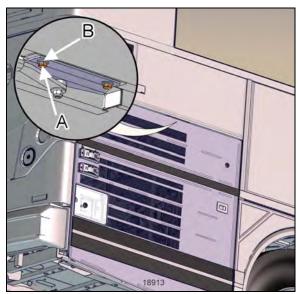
BALANCING ARM MOUNTING SCREWS
